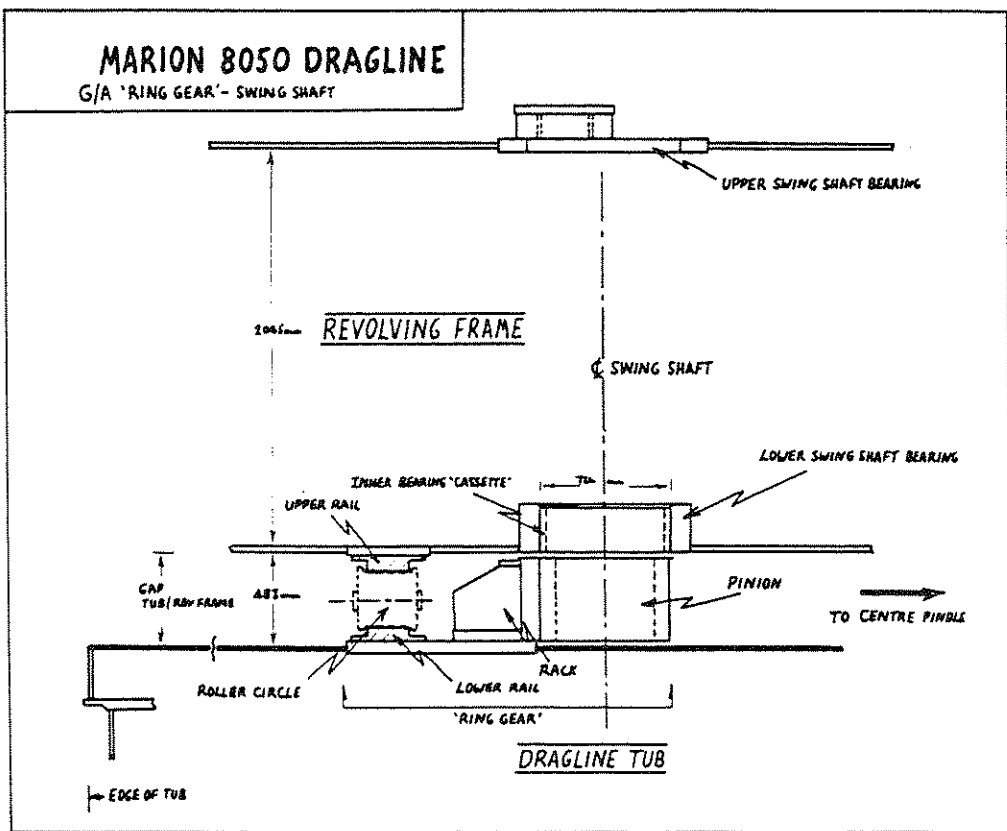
Dragline 15 'ring gear' / swing shaft arrangement
